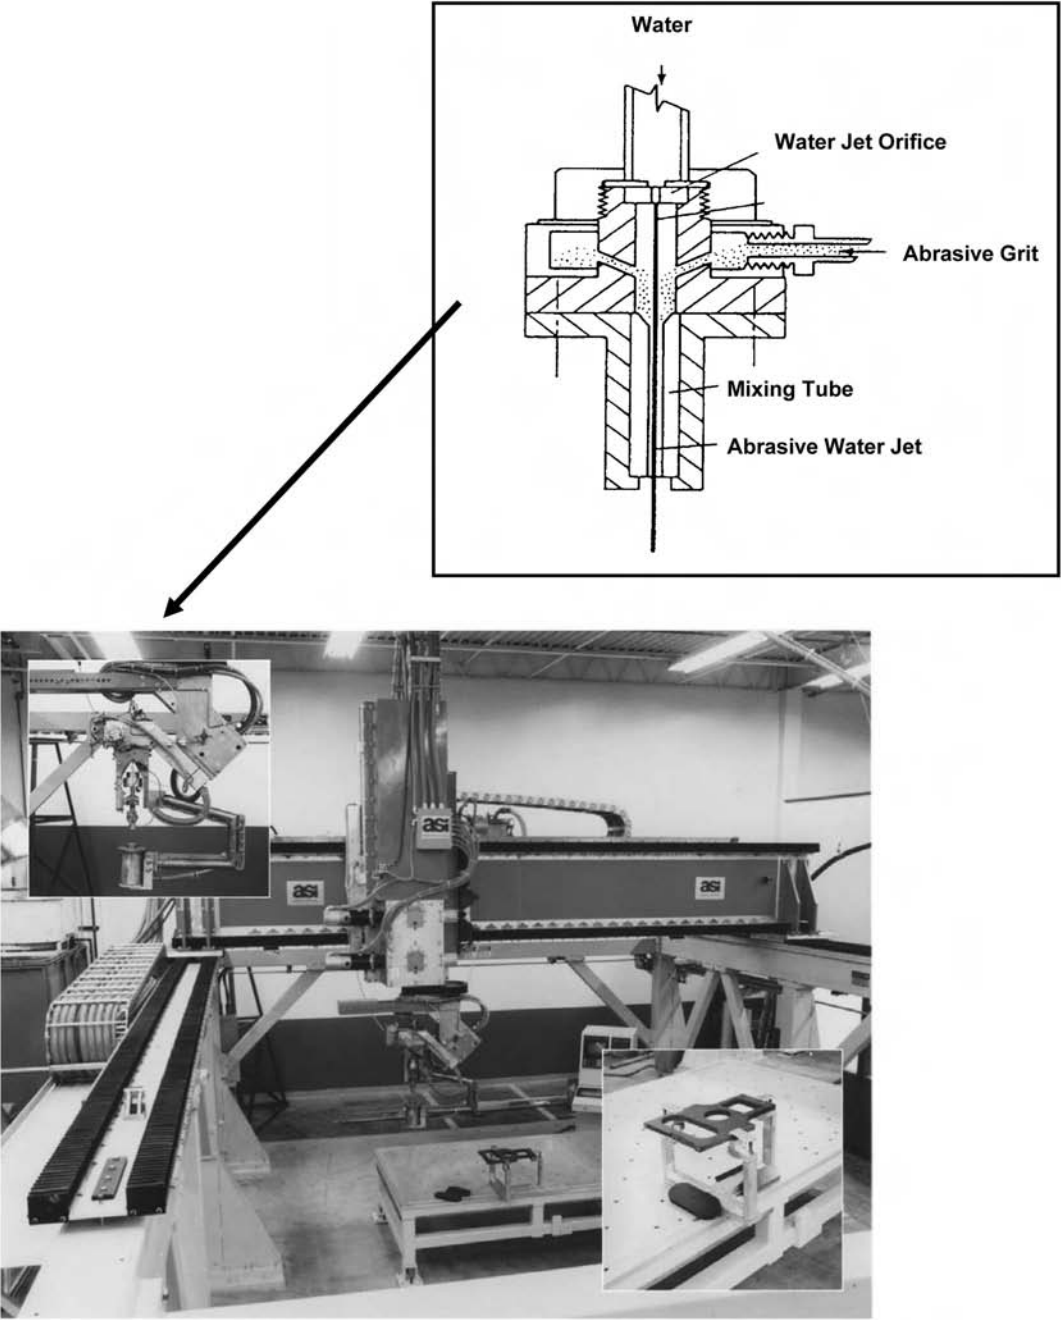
Abrasive water jet trimming machine tool. Source: The Boeing Company
